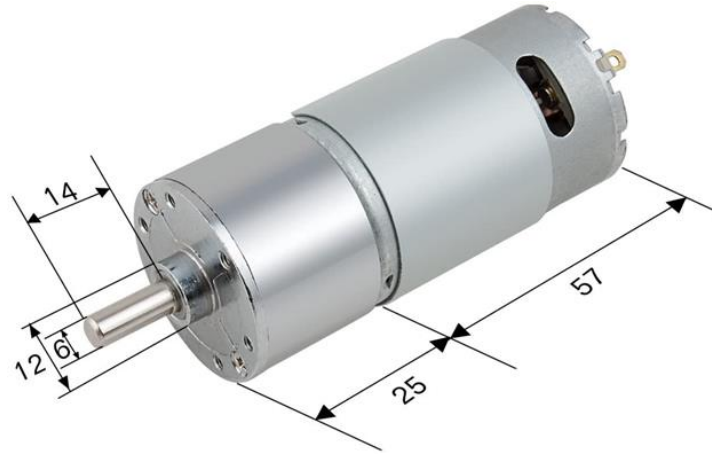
uxcell DC 12V 335RPM Gear Box Motor with centric output shaft model no. a18030100ux0053 [51]
